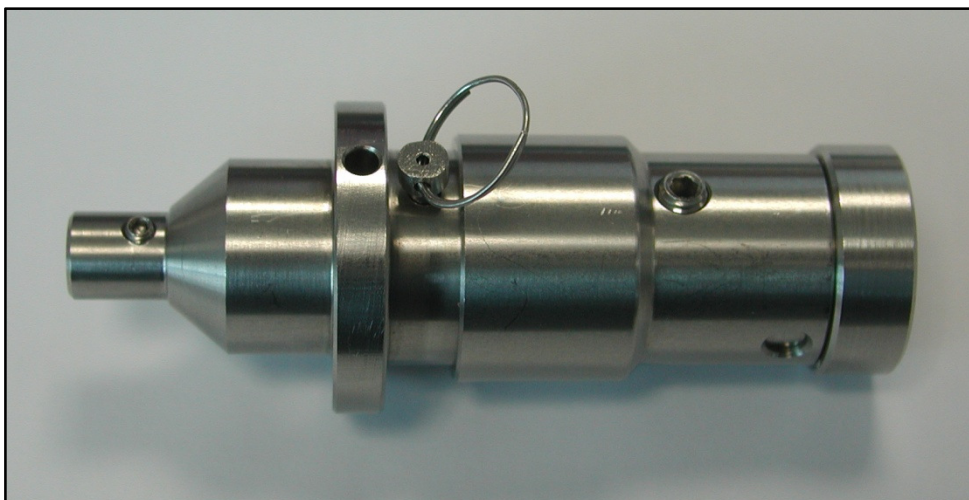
FABRICATED STAINLESS STEEL ACTUATOR
